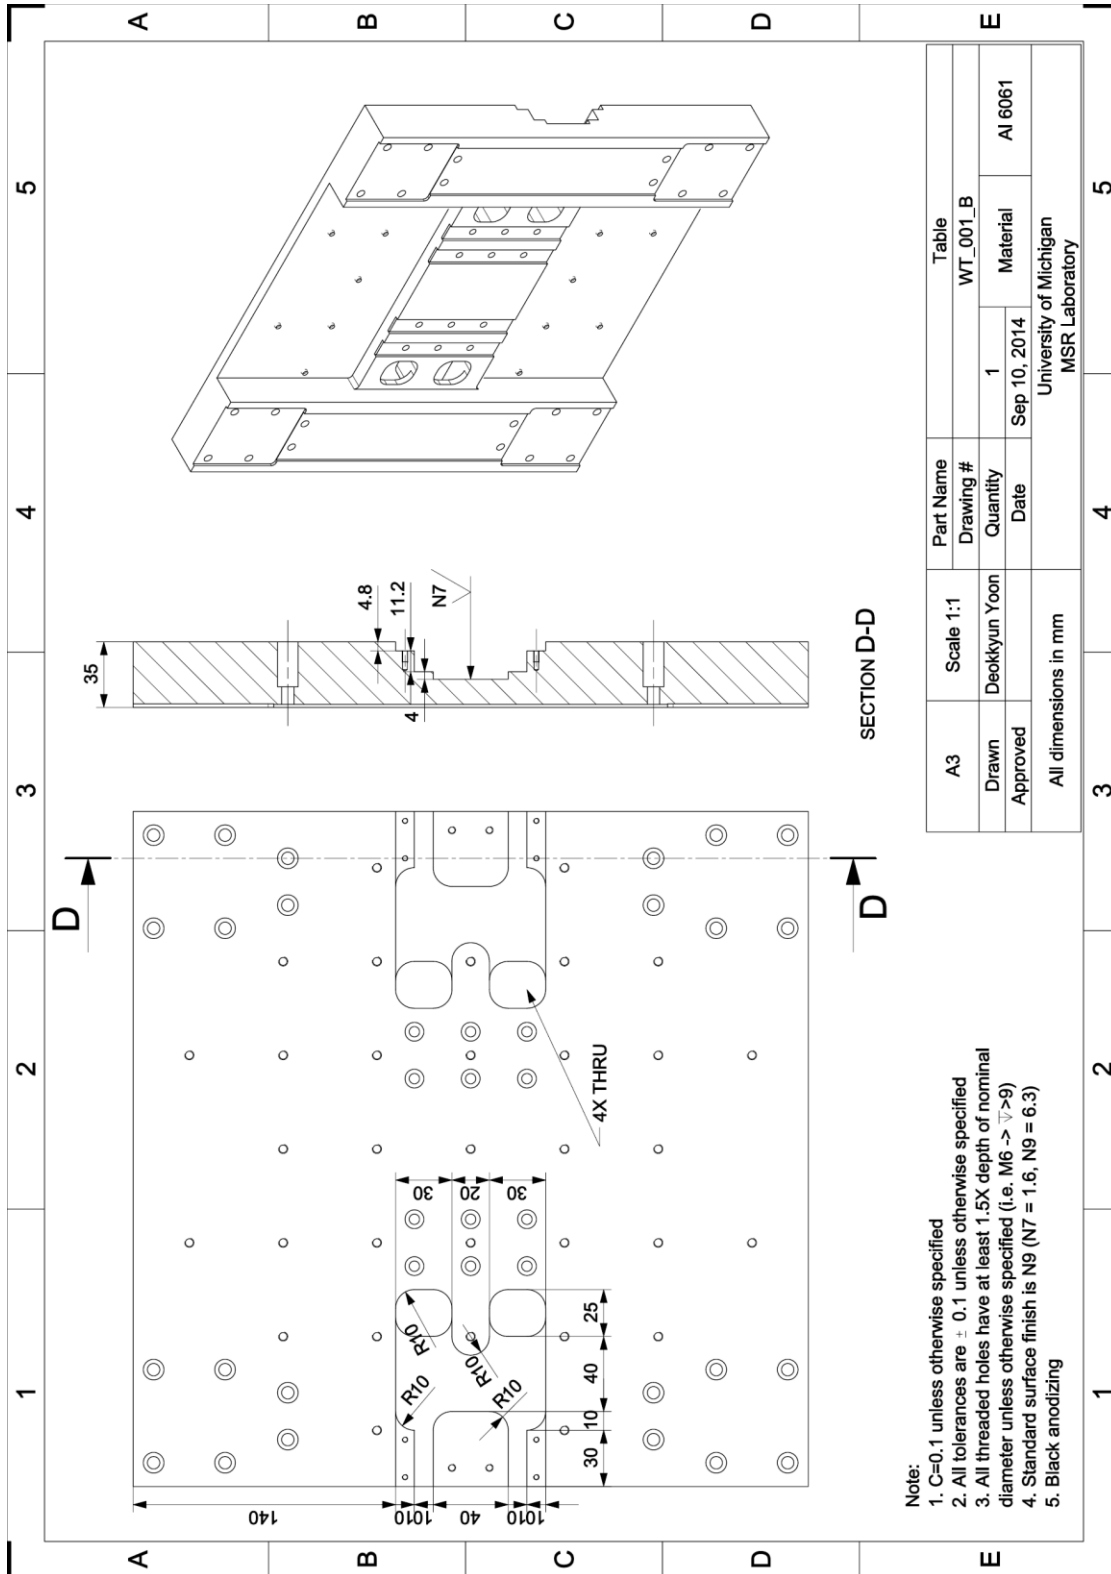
Manufacturing drawing of Table (pg. 2 of 3).
